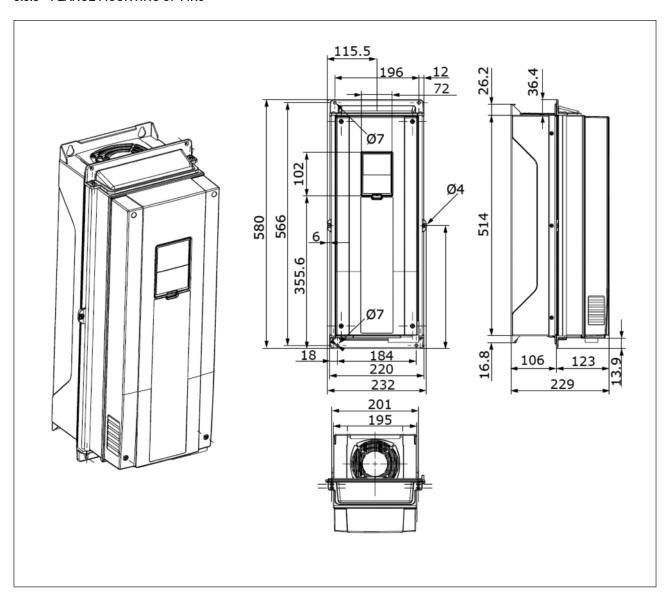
The dimensions of the AC drive, flange mounting, MR6
